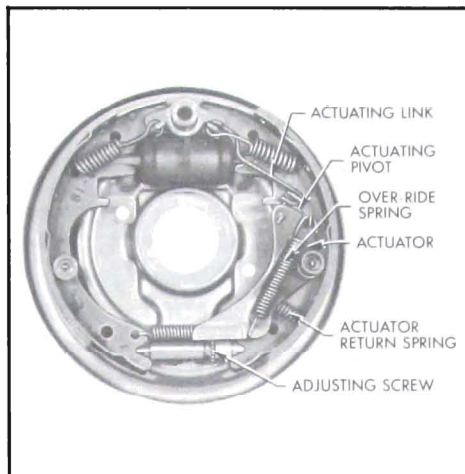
Front Left Brake Self-Adjuster Assembly
